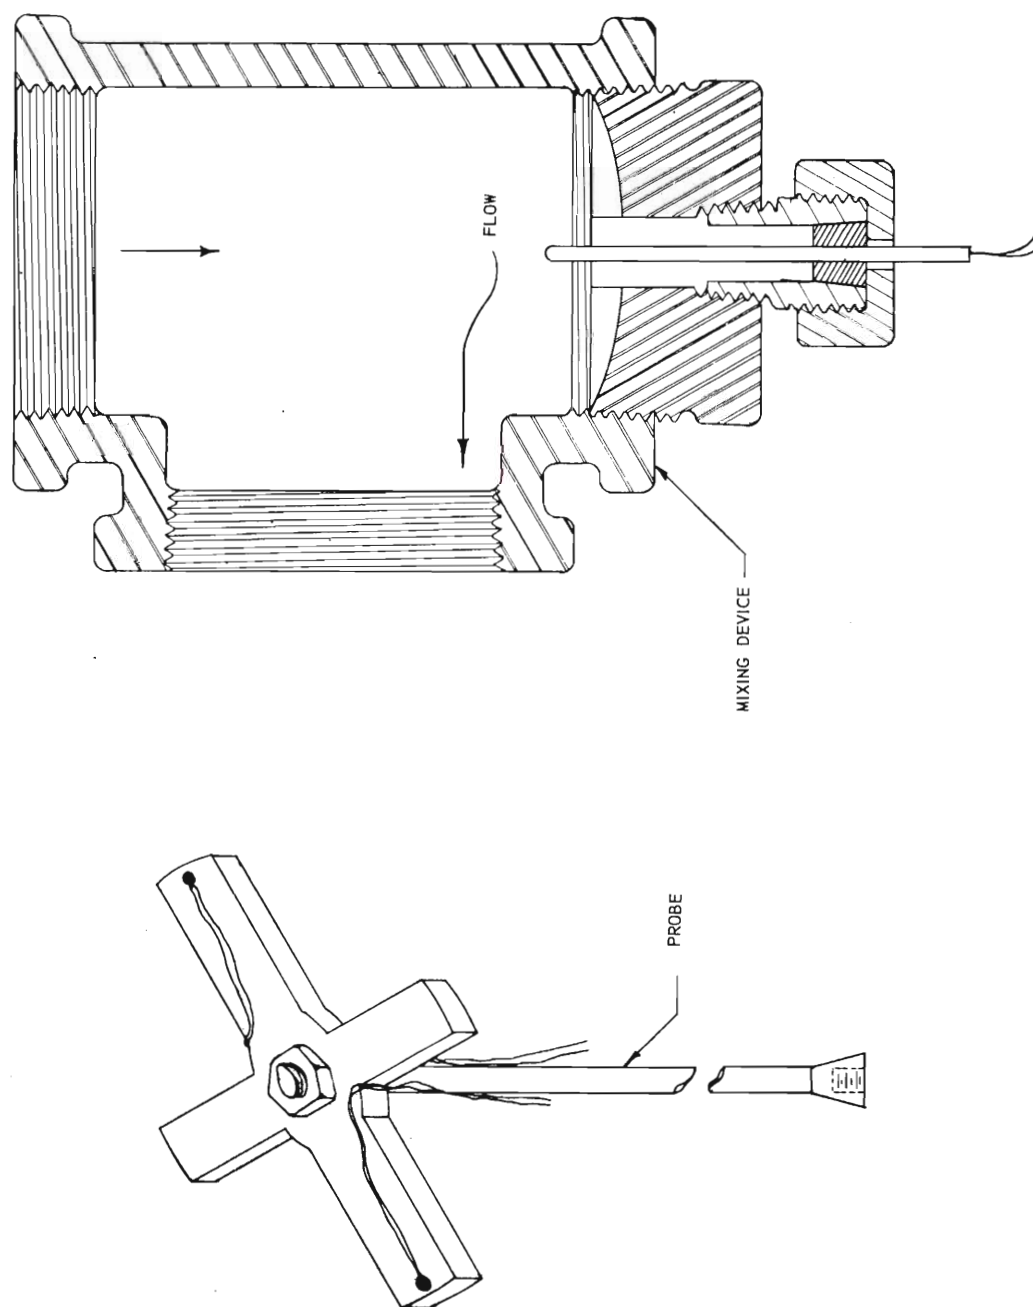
Schematic Drawing of Mixing Section and Thermocouple Probe Assembly.
